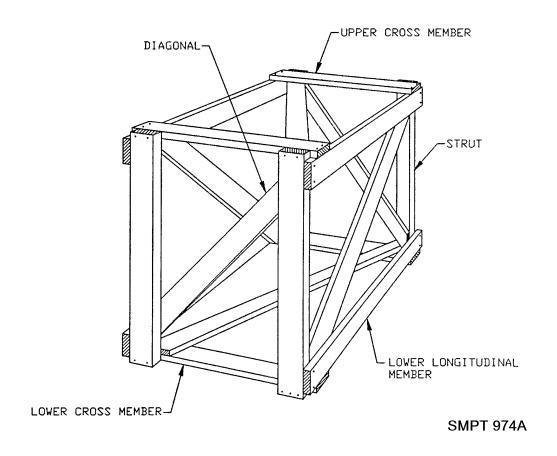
Type I, style B crate assembly (MIL-C-52950).
